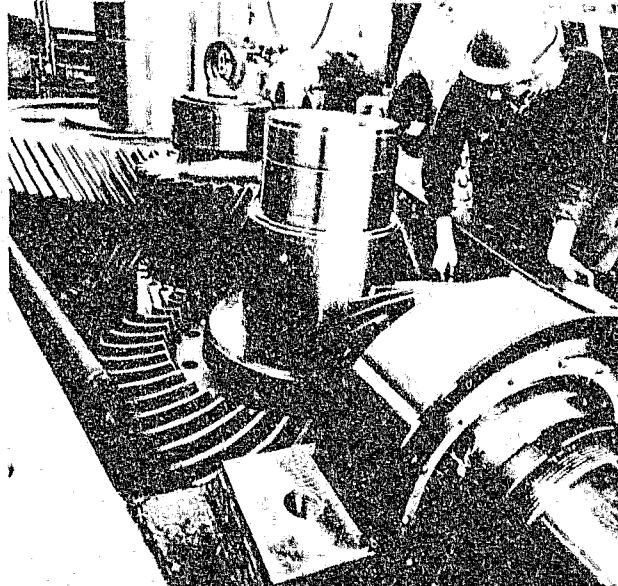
Gearbox for Loesche LM 32/4 mill
